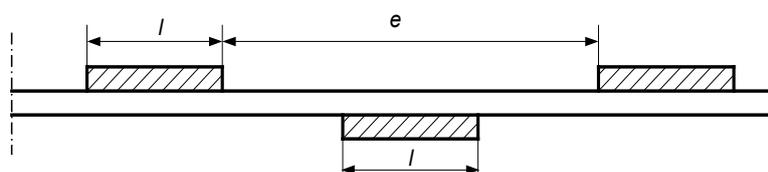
Staggered welds
